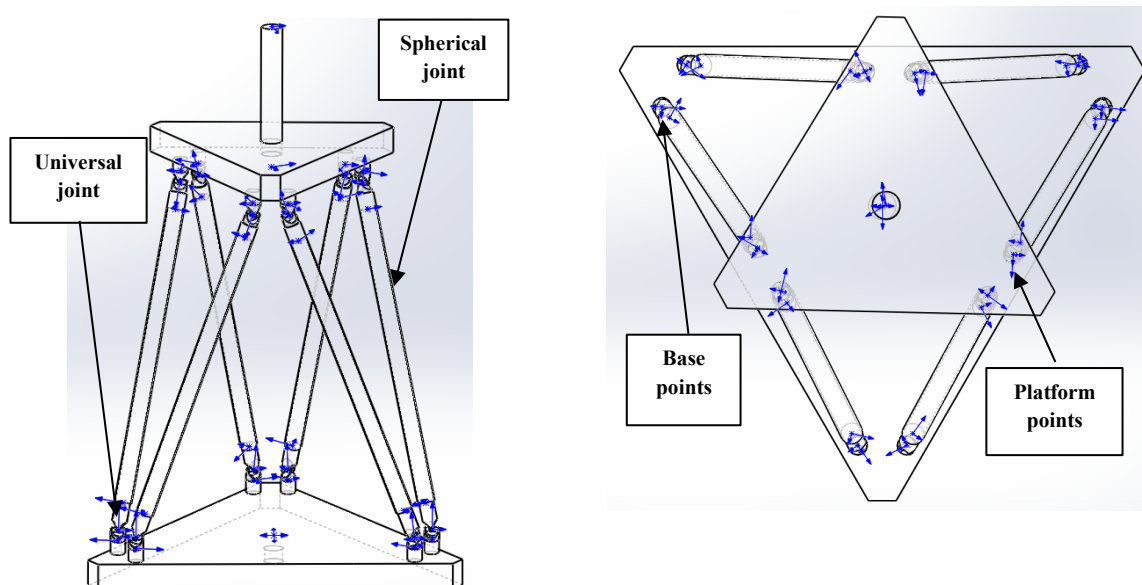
SolidWorks drawing of the surgical platform showing the legs attachment points, spherical and universal joints
